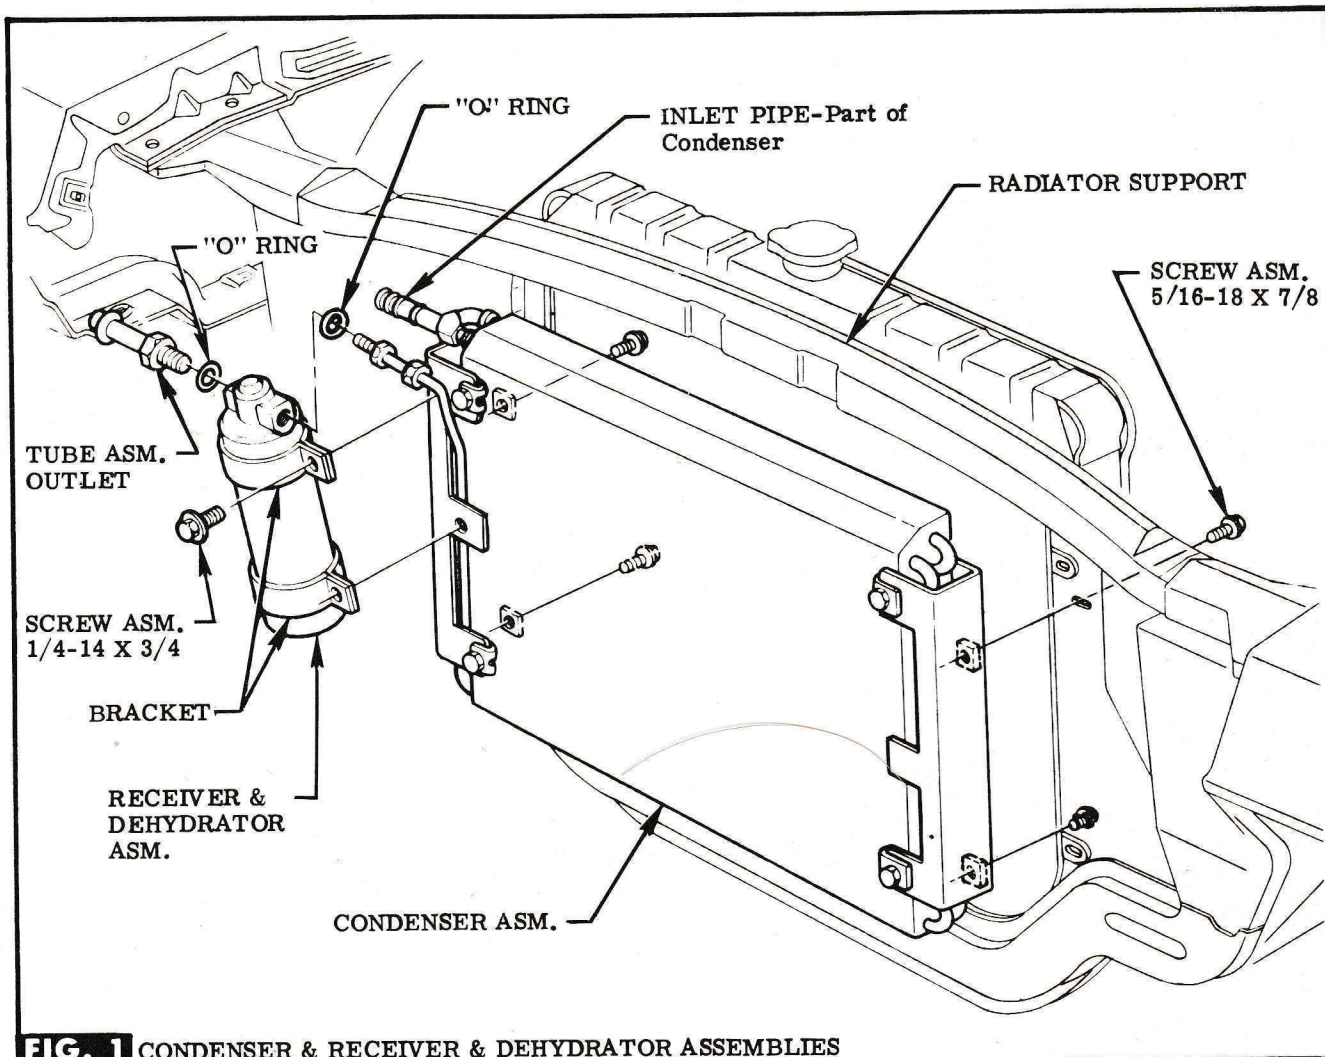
CONDENSER & RECEIVER & DEHYDRATOR ASSEMBLIES
